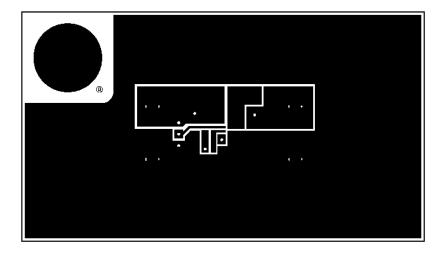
Step-Up Converter Demonstration Board Top Layer Copper
